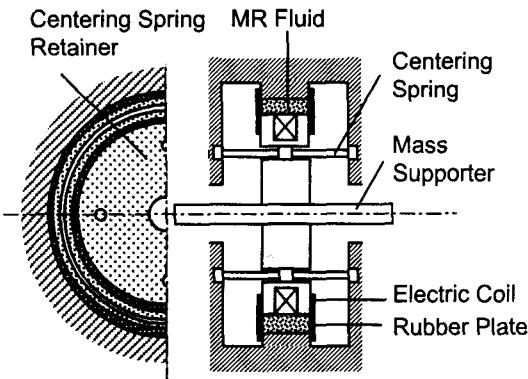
Schematic of the SFD using MR fluid without ball bearing
